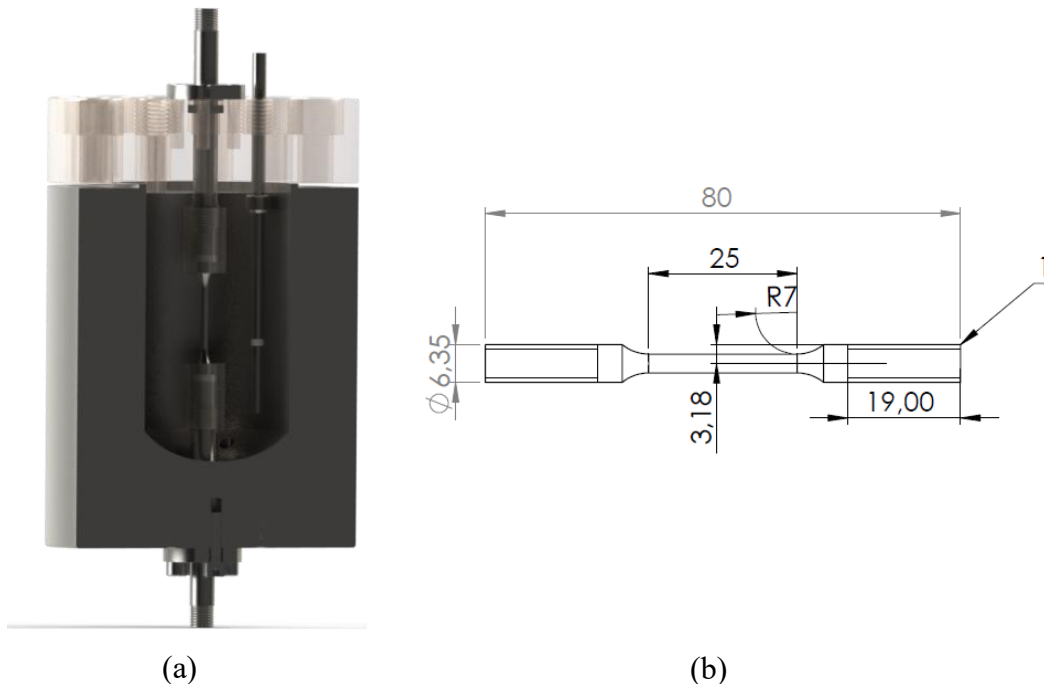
Assembly of the ASTM F1624-12(2018) test with a round specimen inside the autoclave and round specimen drawing. Dimensions are in mm.
